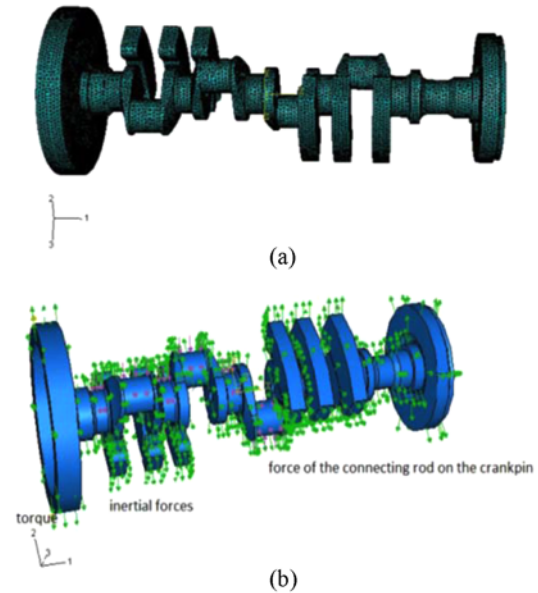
Crankshaft modeling: (a) Mesh; (b) mechanical load applied on crankshaft.
